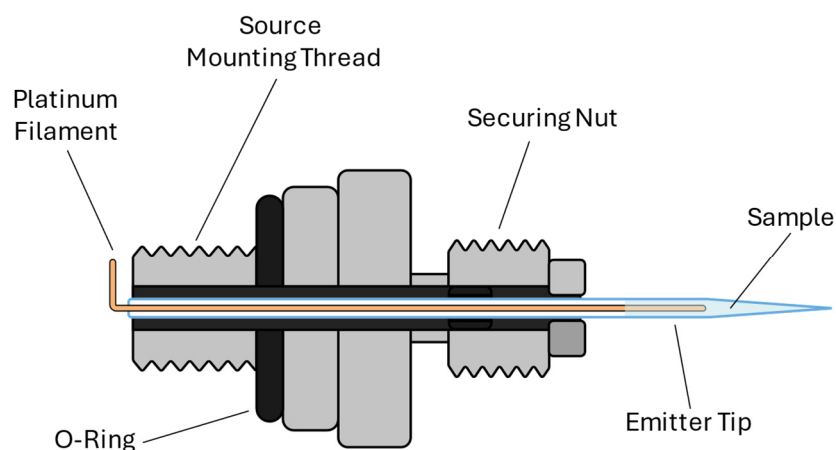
| Cut-away schematic representation of the assembled nESI emitter tip housing assembly.
